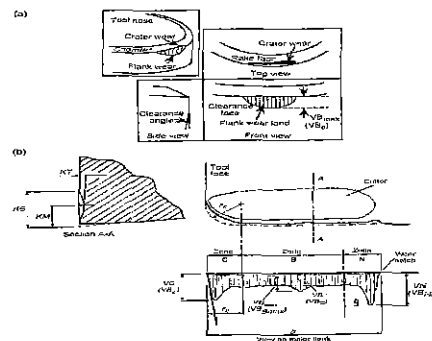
Diagram of worn cutting tool showing principal locations and types of wear [4, 5]
